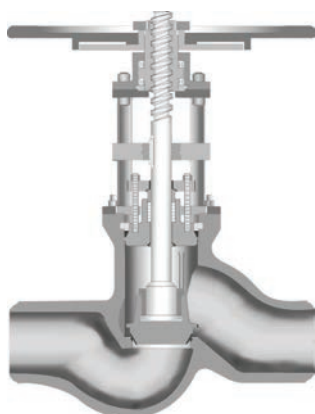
B Globe, Butt Weld Ends
